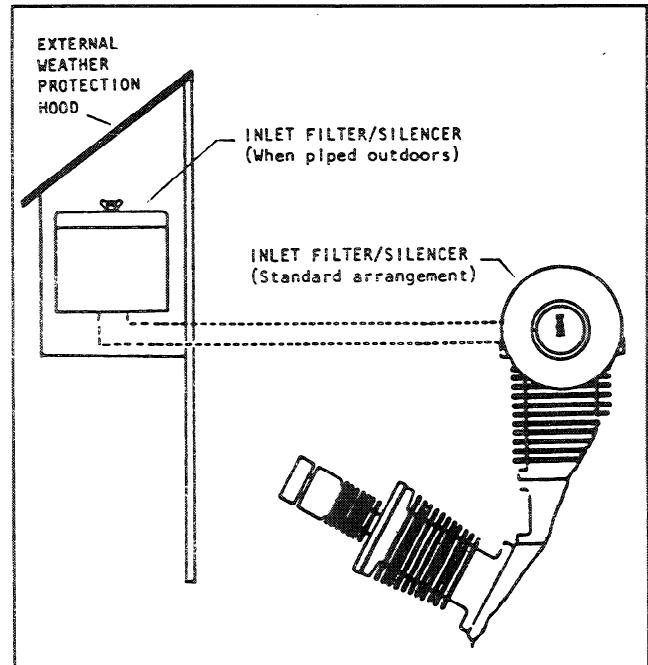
Typical Alternate Inlet Piping Arrangement.
